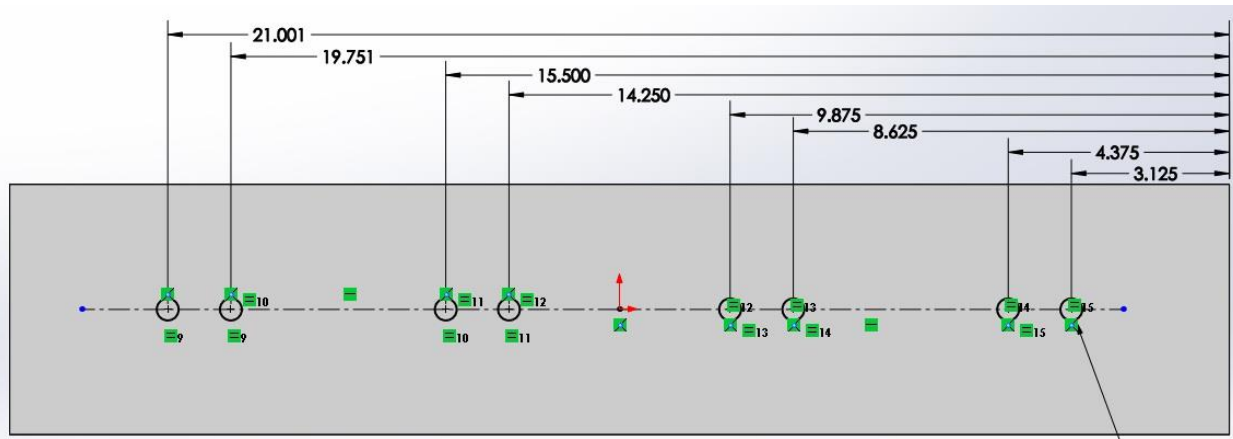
Dimensions for the tapped holes for valve attachment on the Back PVC block.
